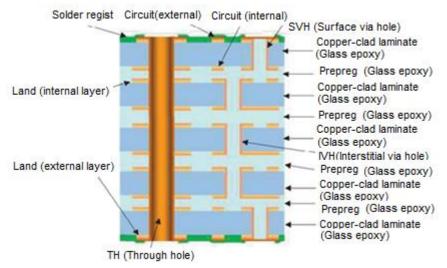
Printed Wiring Board with IVH (example: 10 layers)
